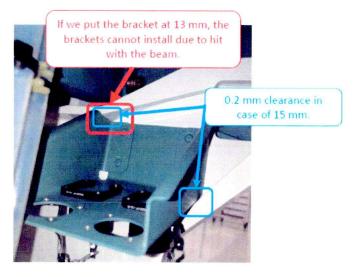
CARGO HOOK CONNECTOR BRACKET LOCATION
